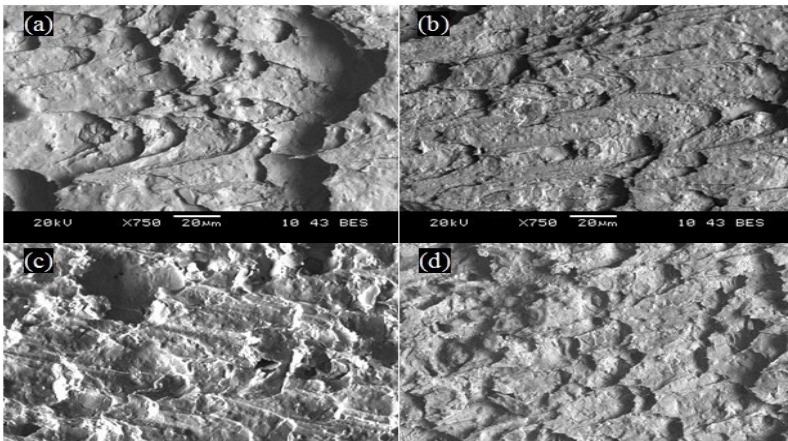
Fracture surface of solder joint by SEM for 1000 h aging time: (a) SAC, (b) SAC-0.1Zn, (c) SAC-0.4Zn, (d) SAC-0.7Zn.
